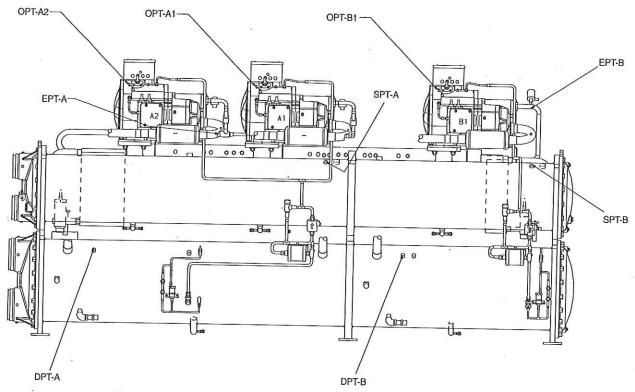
B — 30HX Pressure Transducer Locations (3-Compressor Unit)
